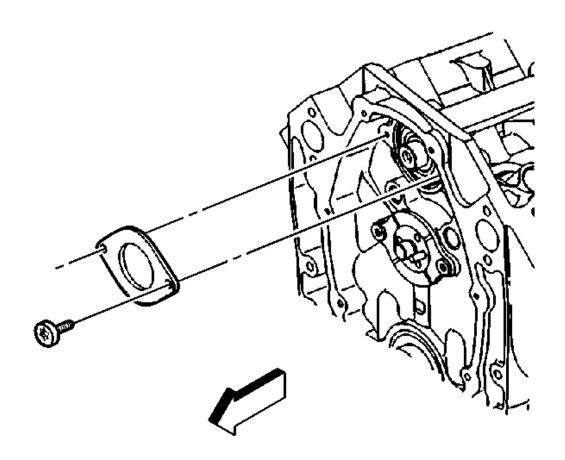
View of Balance Shaft Retainer & Bolts Courtesy of GENERAL MOTORS CORP.
